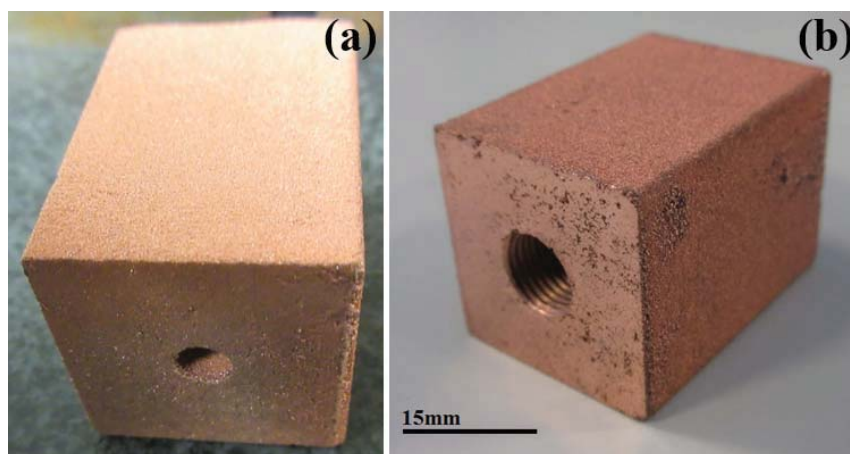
Printed Copper Block (a) Prior to Machining, (b) After Machining
